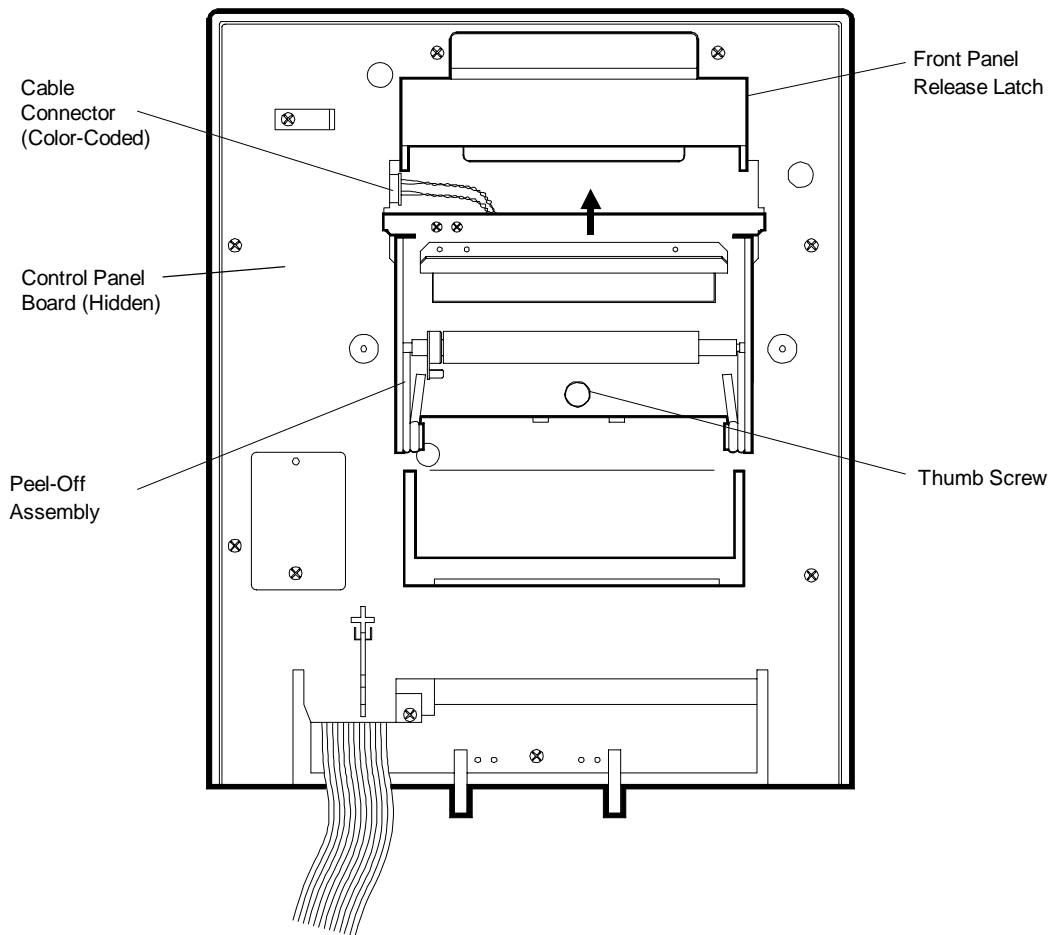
Model 48 and 412 Peel-Off Assembly Removal (Inside Front Panel View)
